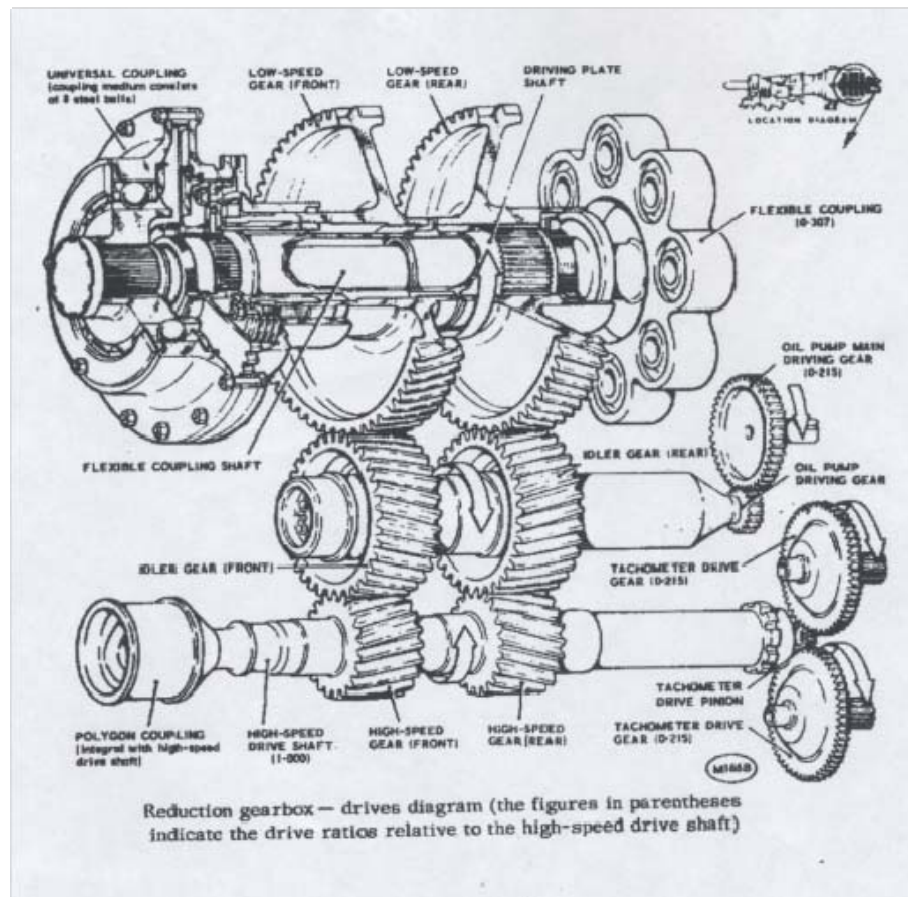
Gnome reduction gearbox internals, Stefanis (2007)
